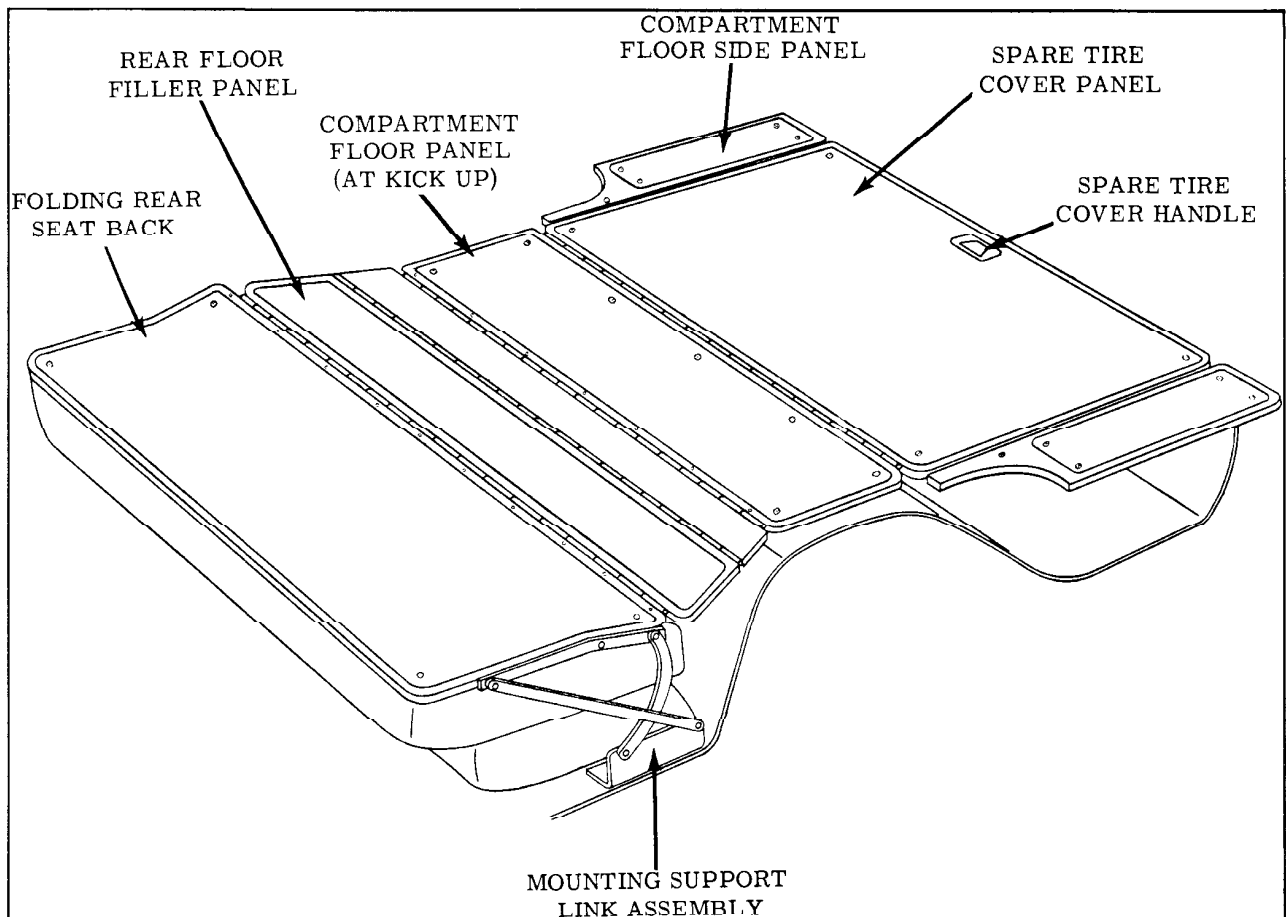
Folding Rear Seat Back and Rear Compartment Floor Panels
